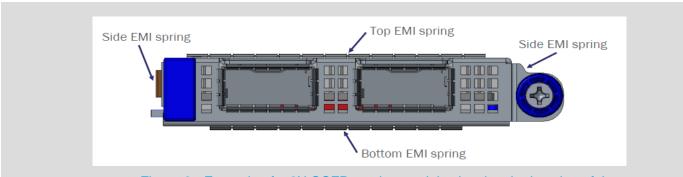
Example of a 2X QSFP version module showing the location of the fingerstock and side springs.
